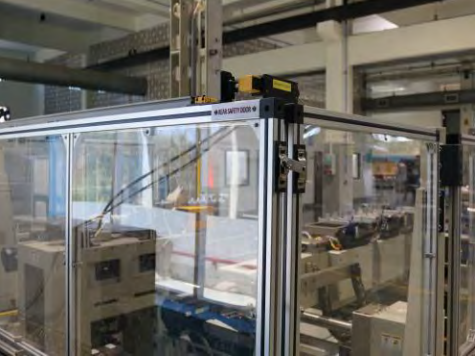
Hazard 3.4, Image 1, Light curtain installed at 342 mm
